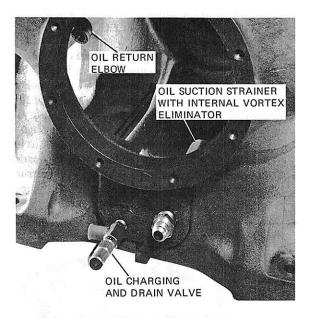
COMPRESSOR OIL PUMP — EARLY STYLE A COMPRESSOR
